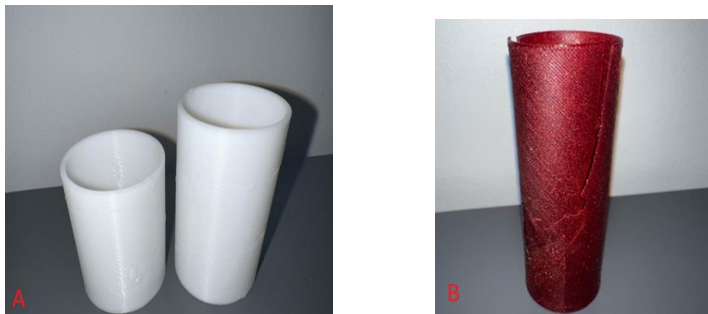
Flexural test specimen failure examples: A – example of horizontal layers; B – example of a cylindrical method.
